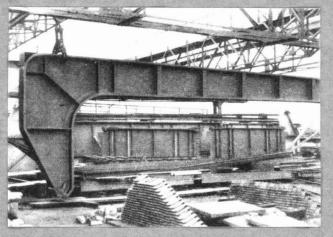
Riveted Frame Used In Fig. 4 - Welded Frame Used The Past
